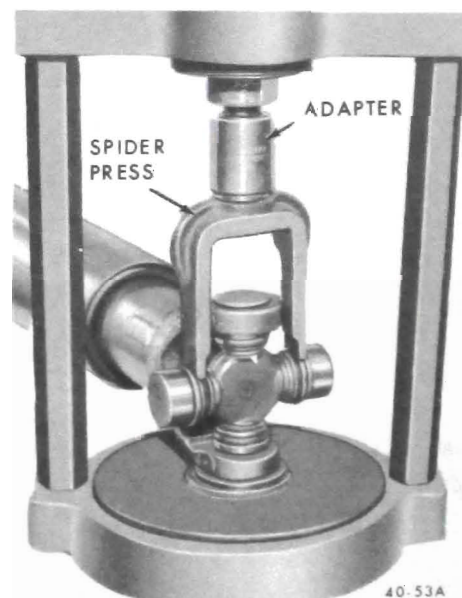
Pressing Out U-Joint Bearing With Guide Installed
